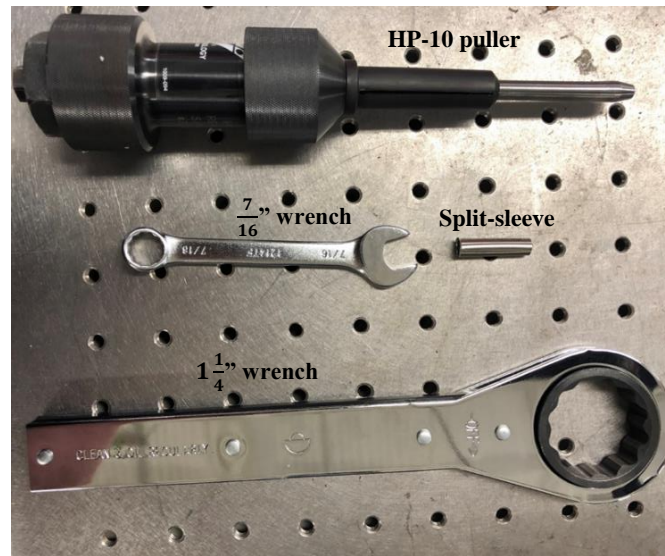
Equipment used for split-sleeve cold expansion of fastener hole.
